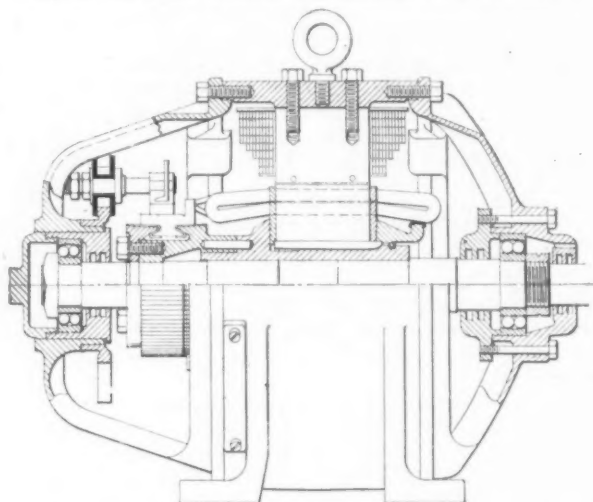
Typical Ball Bearing Mounting on General Service Direct Current Motor
